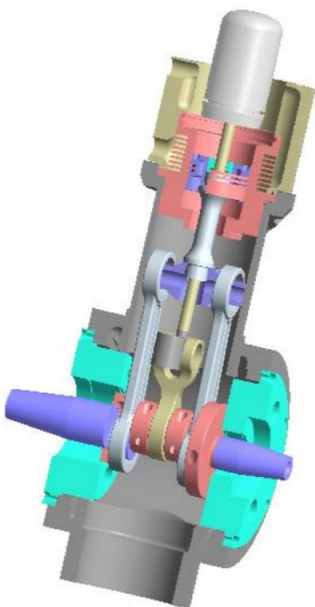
Cold cylinder and cooling jacket fitted on the engine
